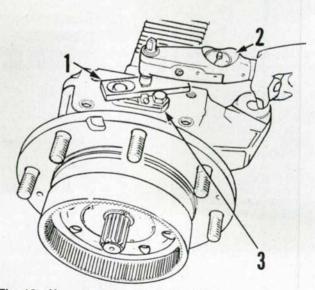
Use a torque wrench (2) with an adapter tool (1) to measure pivot bearing turning torque. Shims are used under flange of upper kingpin (3) to adjust turning torque. Refer to text.
